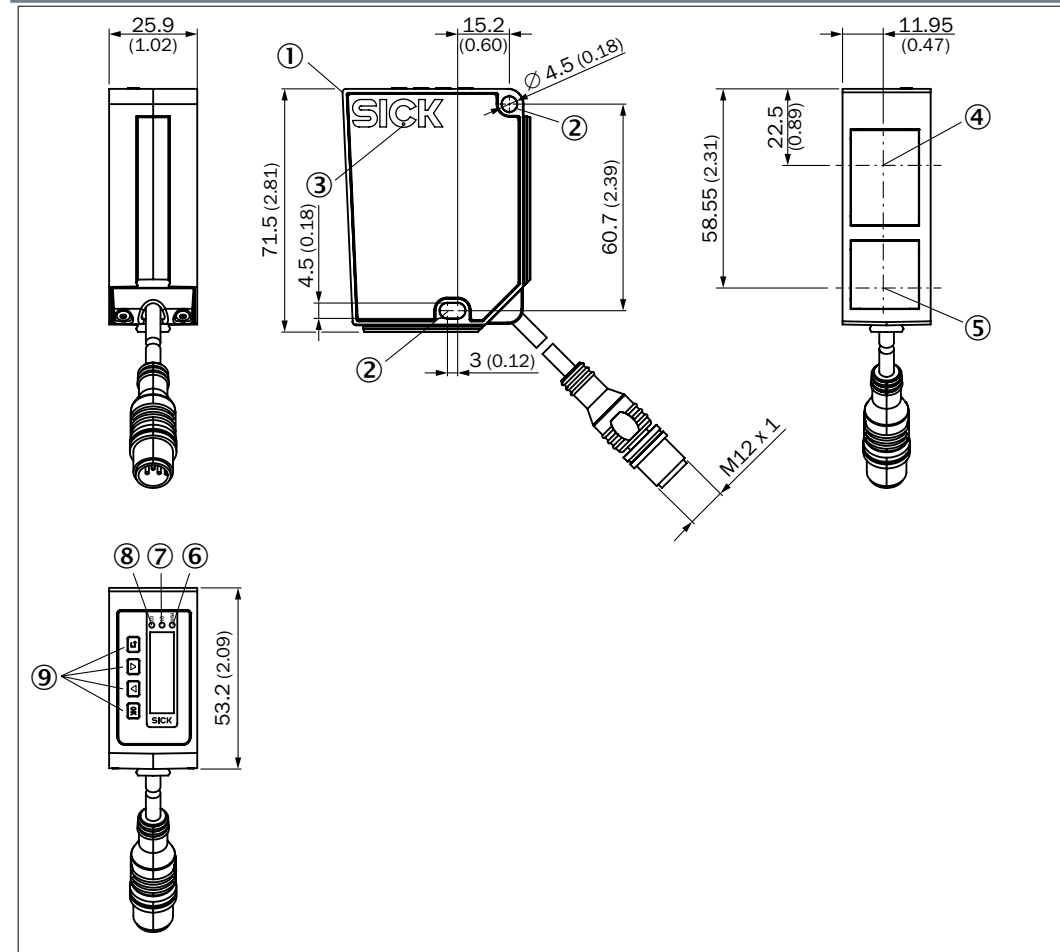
OD1000 device structure and dimensions, dimensions in mm [inch]
